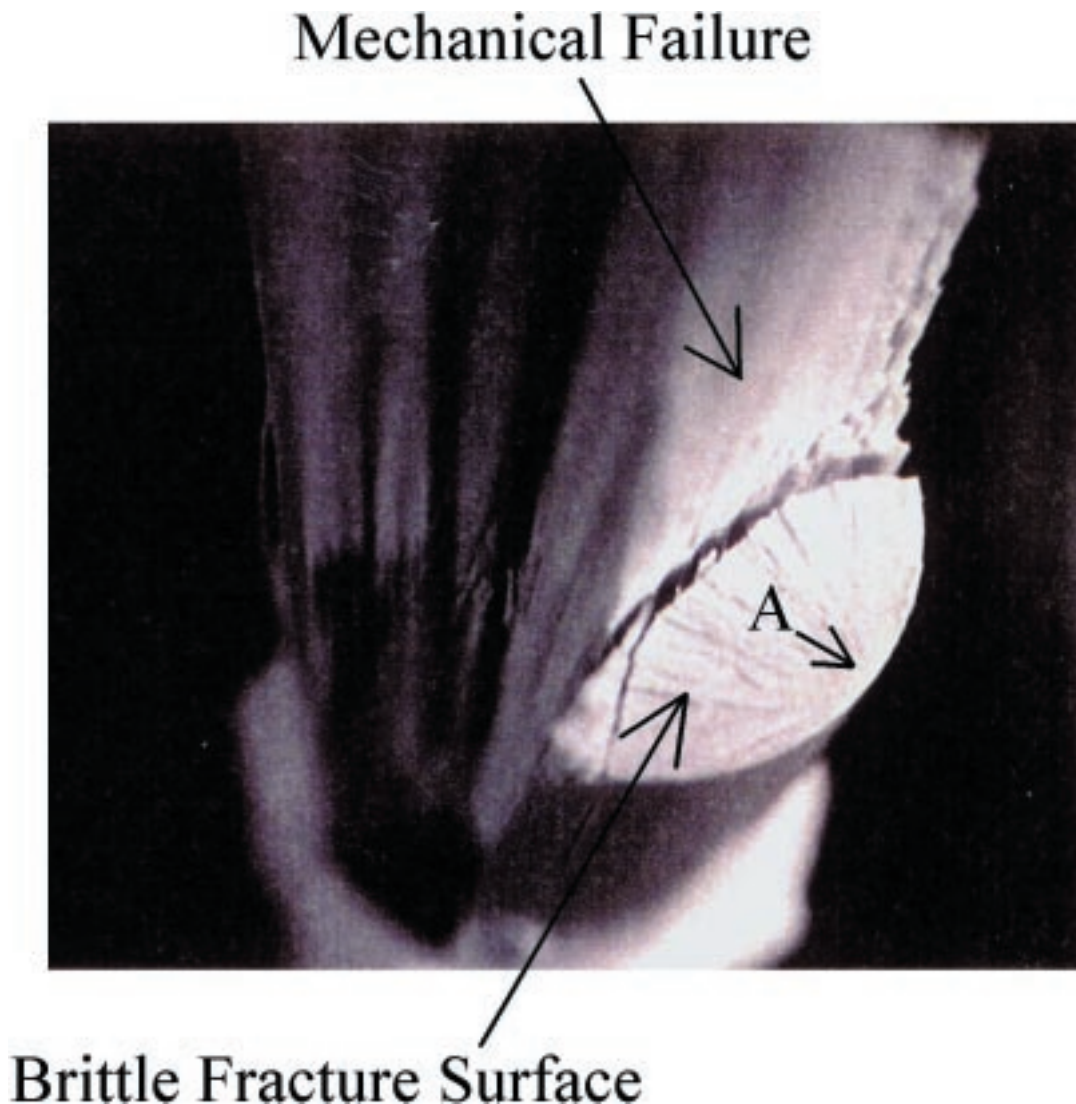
Brittle fracture surface from the stress corrosion experiment on a 16 mm diameter rod with an opening in the rubber coating without a surface pre-crack and a static load of 26.1 kN.
